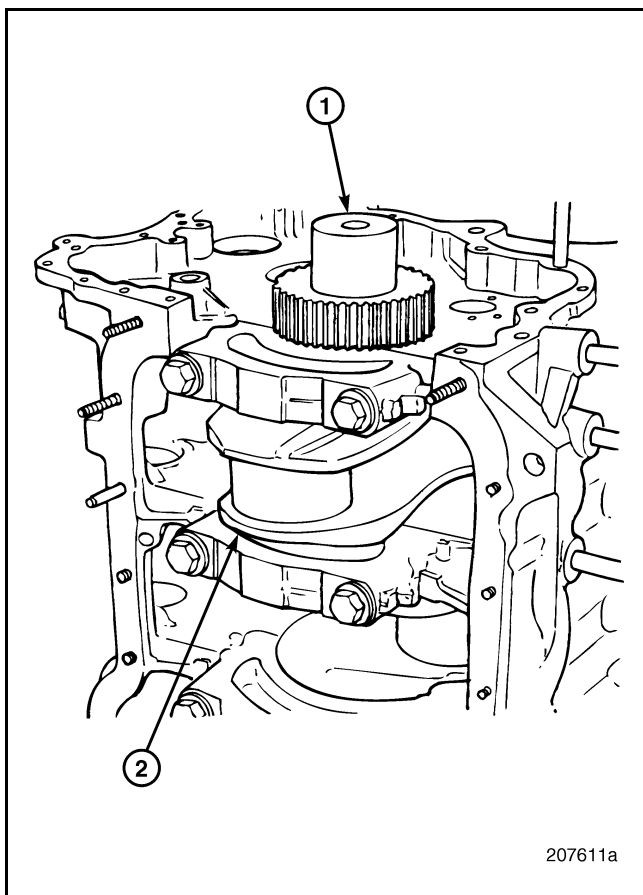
No. 1 Cylinder (Crankshaft at BDC)
